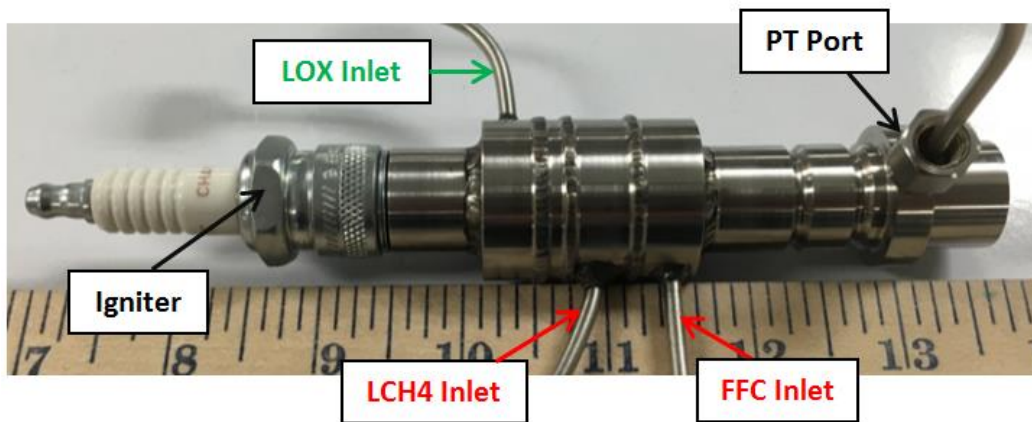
Final manufactured and welded RCE assembly
